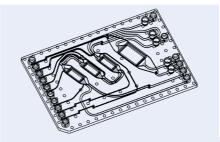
Schematic drawing of the cross-flow membrane chip Fluidic 1356
